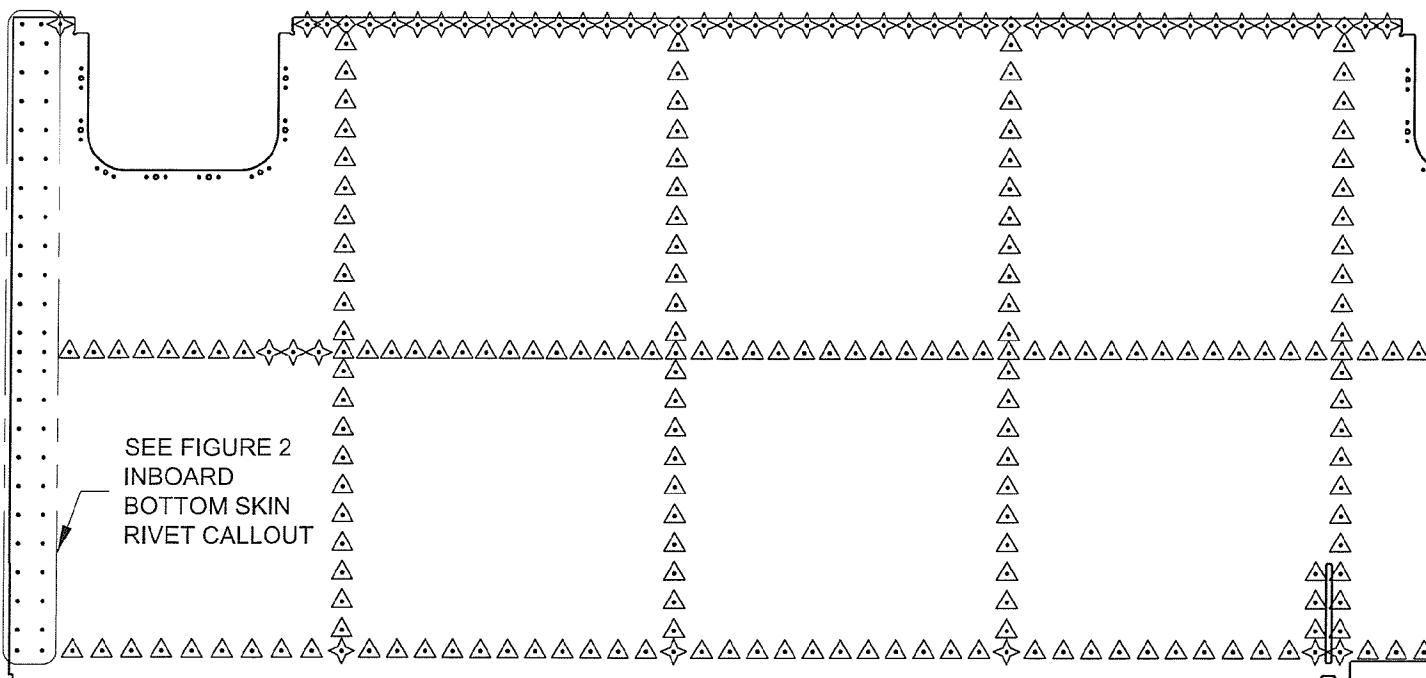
BOTTOM INBOARD SKIN RIVET CALLOUTS
